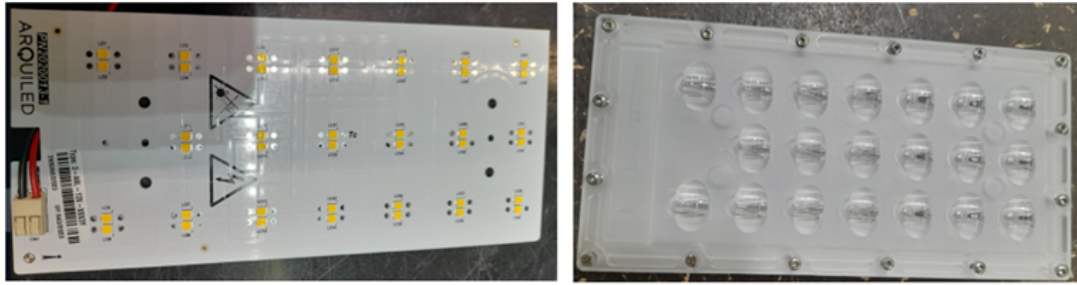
PCB (a) and photometric lenses (b) [21]
